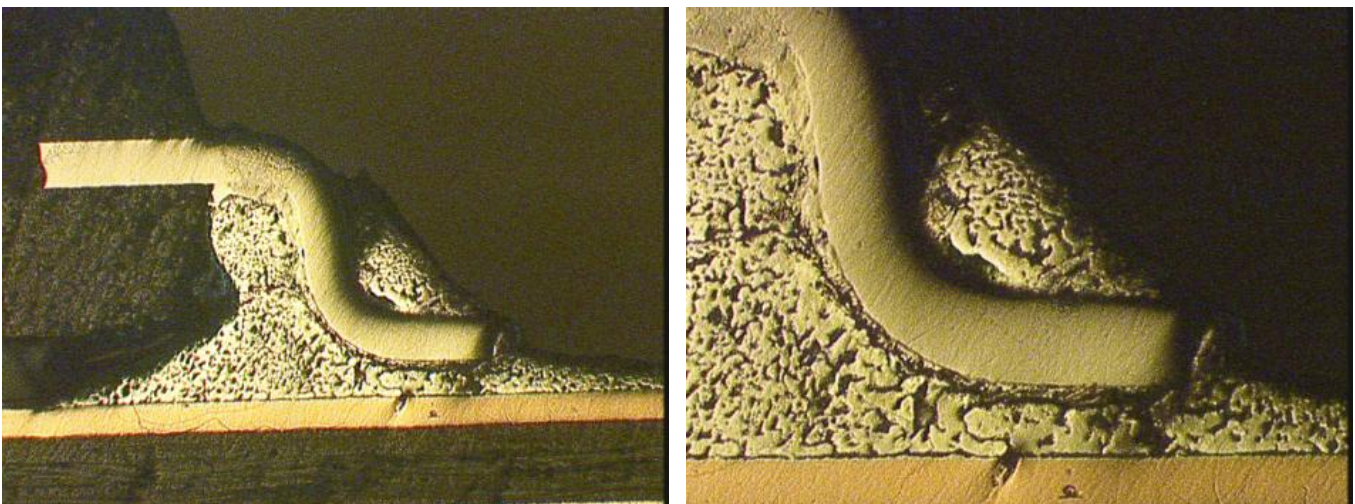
Reworked TSOP-50 Solder Joints, Board 47, Component U24, Initially SAC305/SnBi, 2 rework SnPb/SnBi, Failed @ 1810 Cycles
